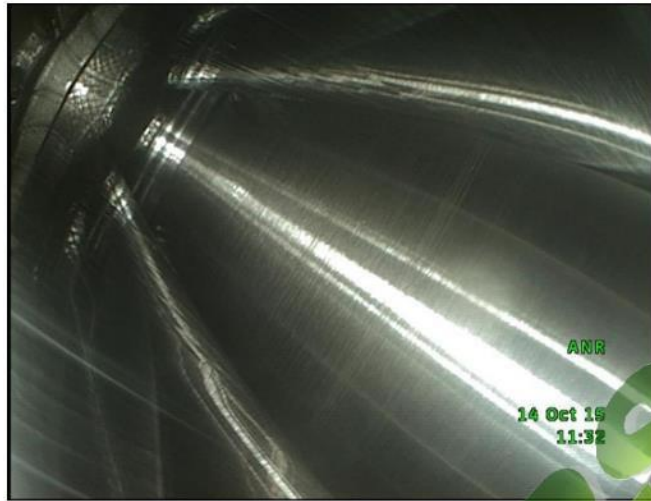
shows the bearing of the second planet wheel. No irregularities.
